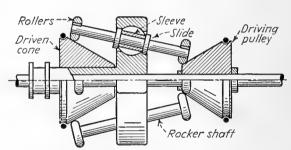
In this transmission, the cones are mounted in line and supported by the same shaft. One cone is keyed to the main shaft and the other is mounted on a sleeve. Power is transmitted by a series of rocking shafts and rollers. Pivoting rocking shafts and allowing them to slide change the speed ratio.
